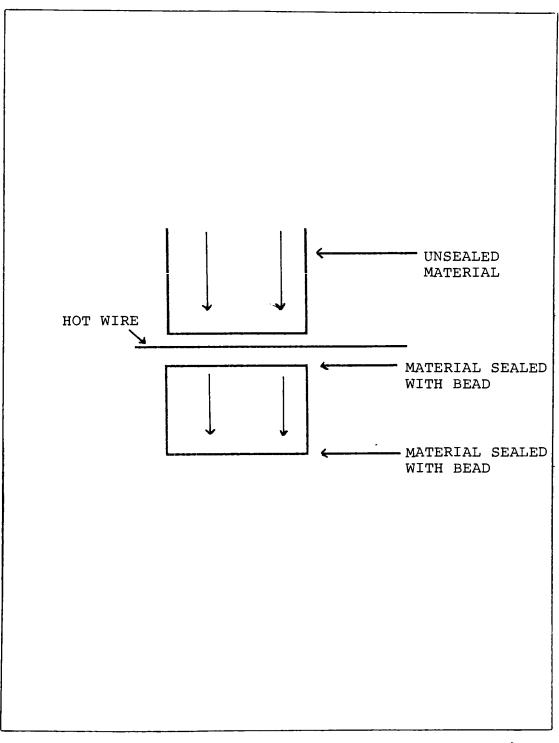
HOT WIRE SEALING - Top view Picture shows material traveling under hot wire to form bag
